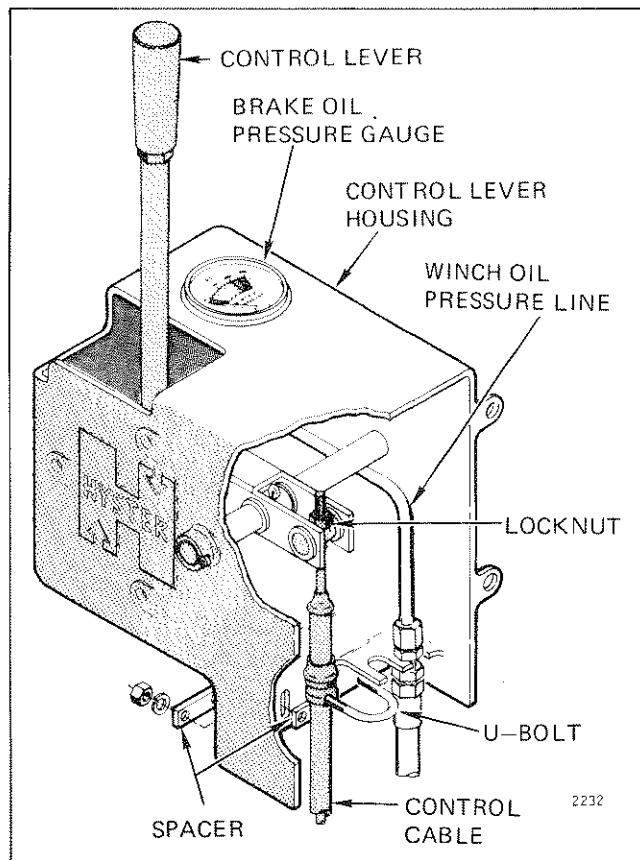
CONTROL LEVER ASSEMBLY, POWER-FORWARD ONLY WINCH (PFO)
